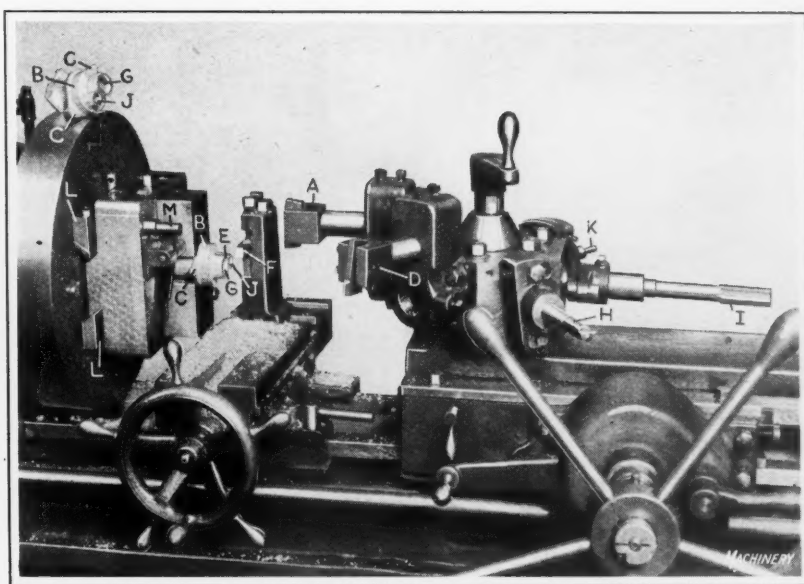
Three-station Indexing Fixture for locating Distributor Brackets for turning the Body and boring Two Eccentric Holes
